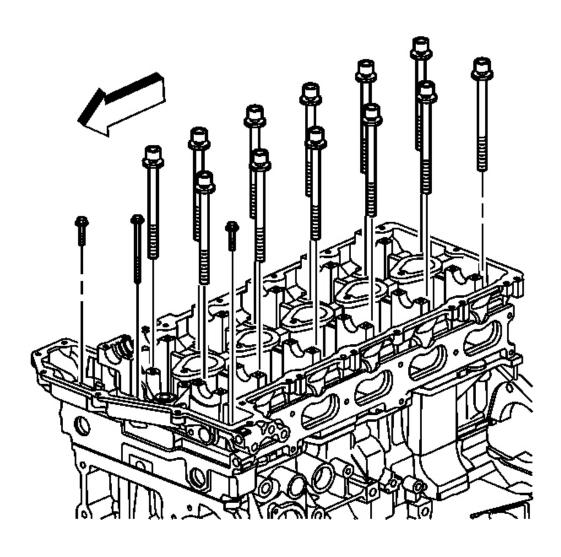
View Of Cylinder Head Bolts Courtesy of GENERAL MOTORS CORP.
